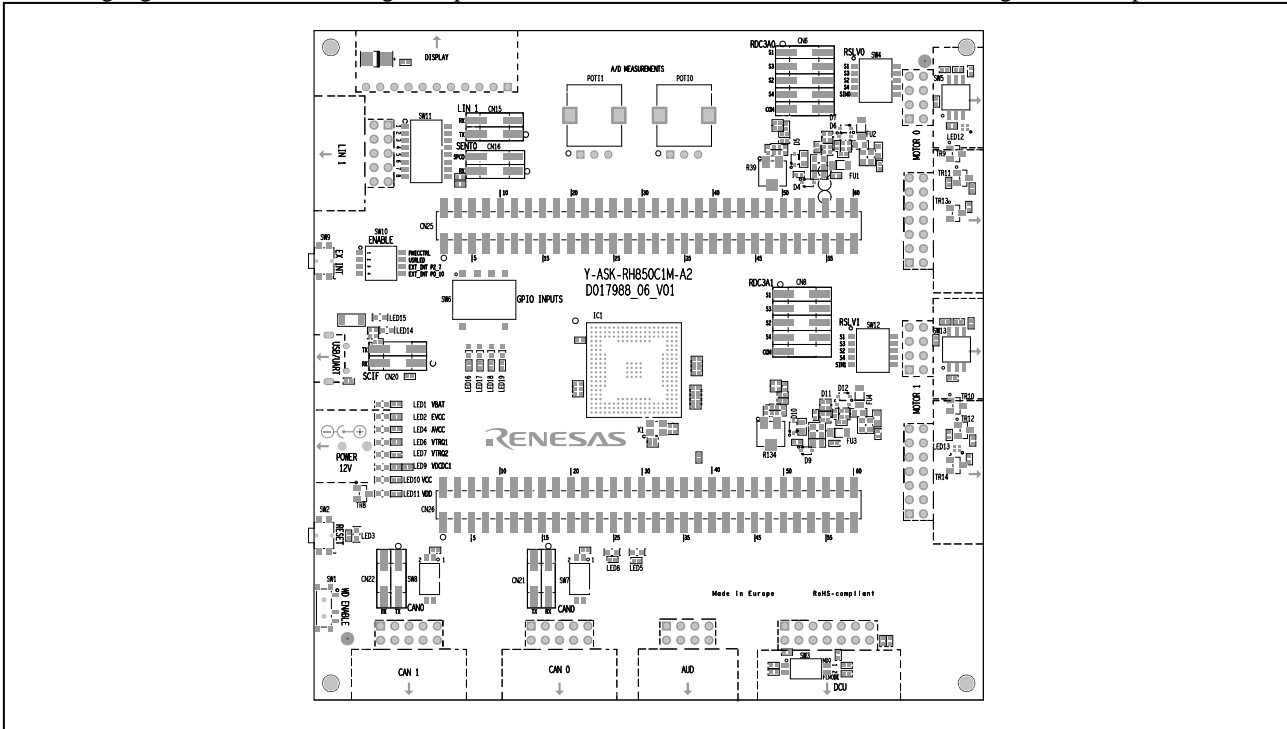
Starter kit board top view, board revision D017988\_06\_V01
